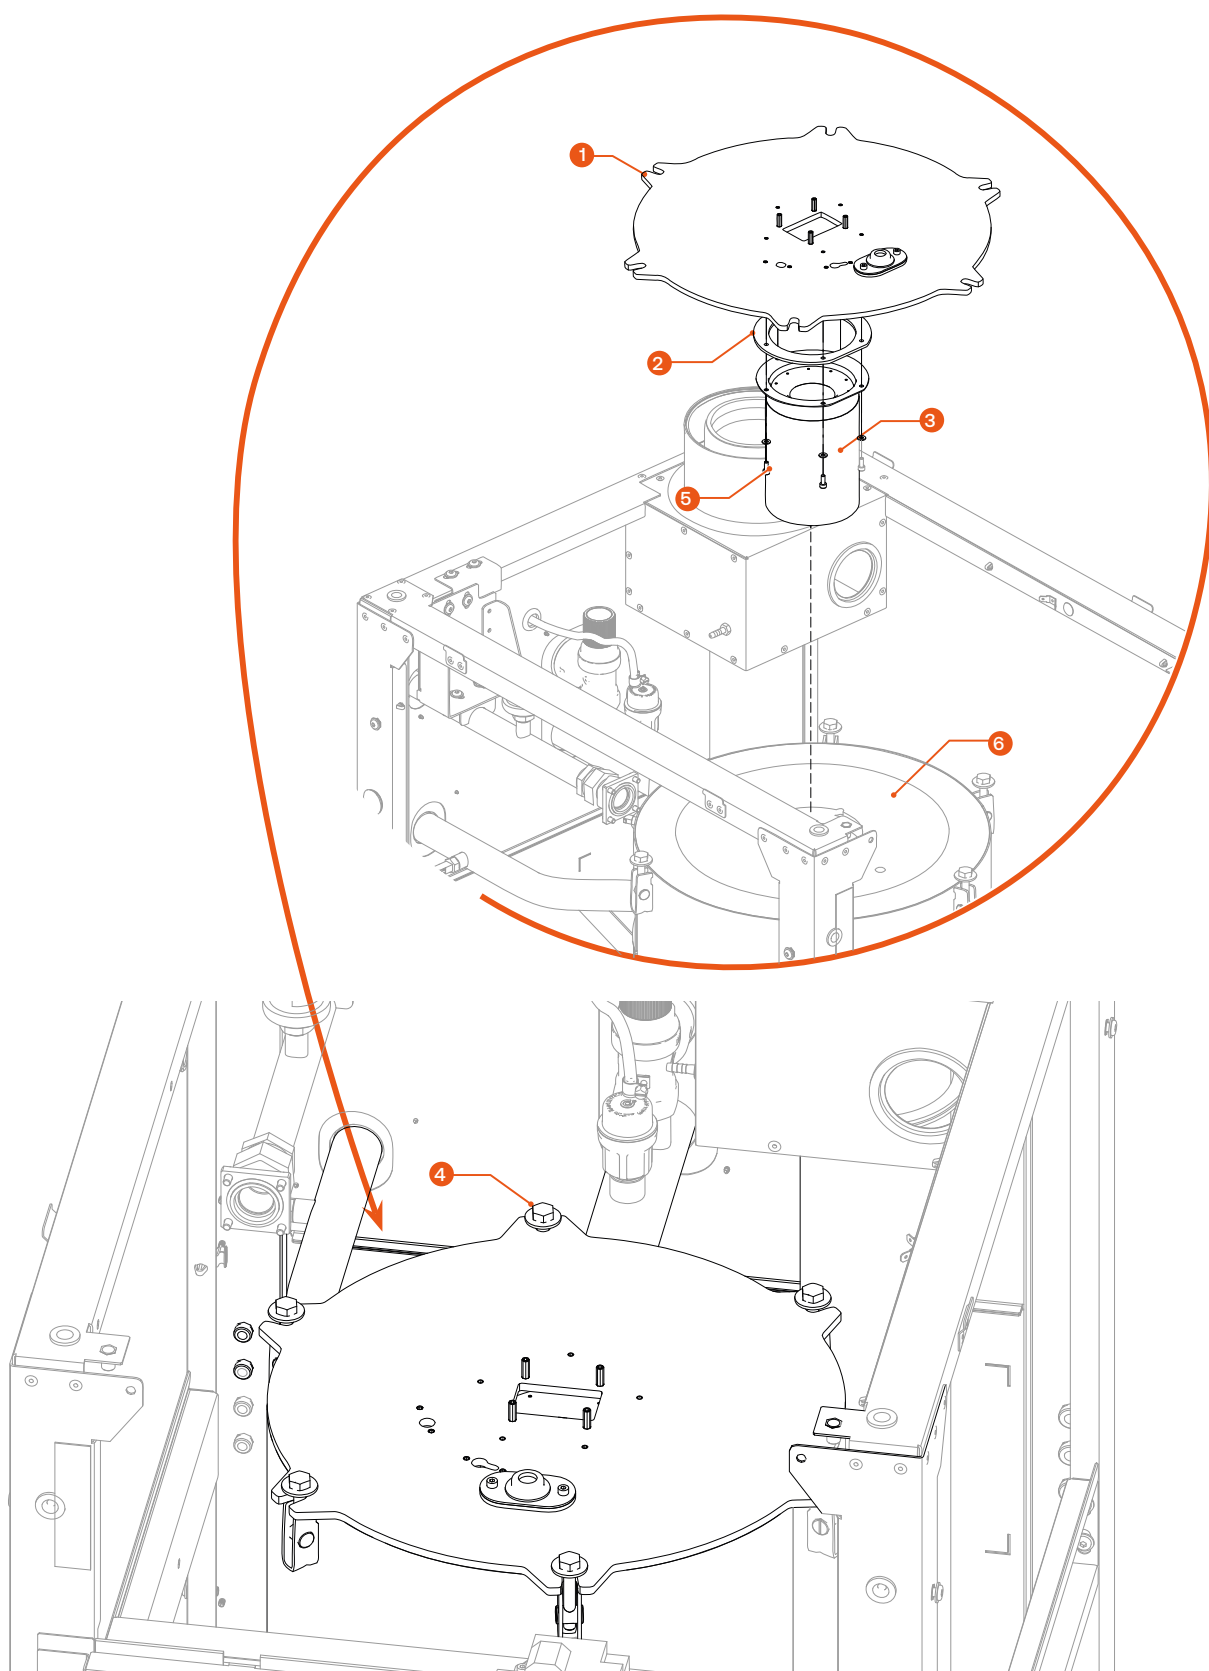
Removing and Installing the Burner - CM 60 to 80
